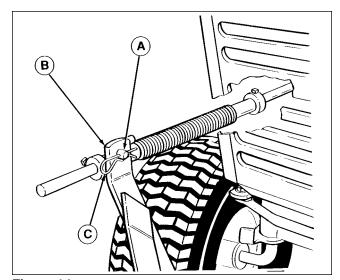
A. Rod Guide B. Push Bar C. Spring Clip
